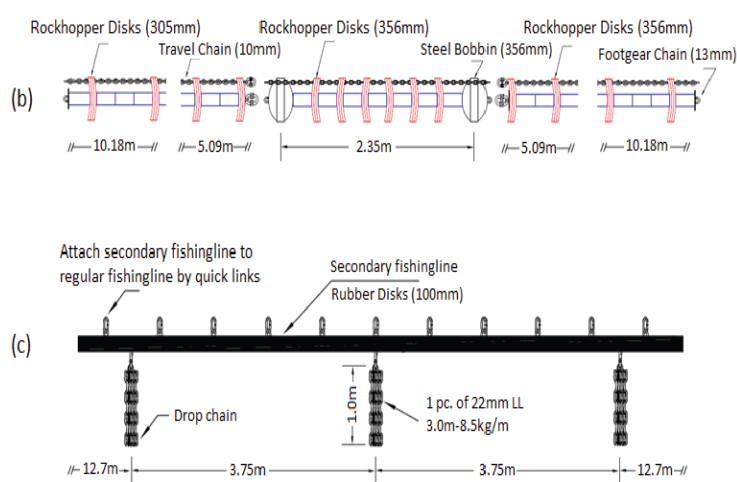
Upper part (b) show a rockhopper gear and lower part (c) a experimental design with dropchains.
